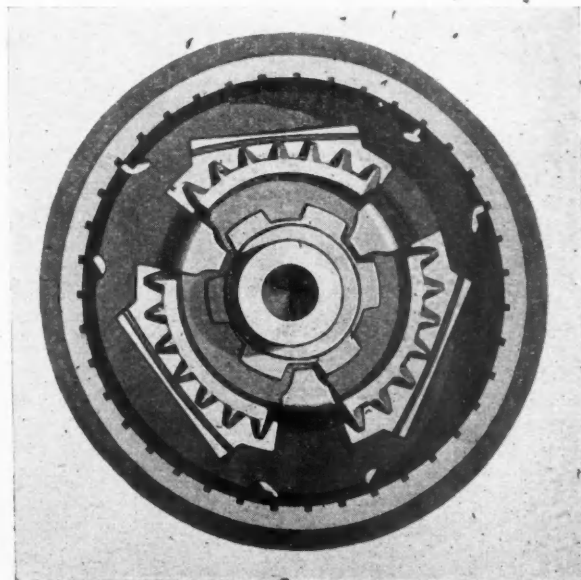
End view of the transmission mainshaft, showing how the synchronizing drum can rotate slightly under pressure so that the servo cam action can take place. The "detent" wires, which assure correct positioning of the inclined faces as soon as the initial contact between the cone clutch faces is made, are shown here + + + + +
